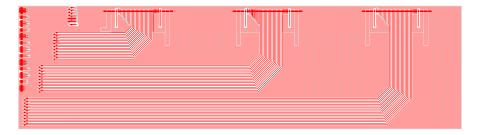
Preliminary design: bottom layer of the two layer aluminium flex-print.
